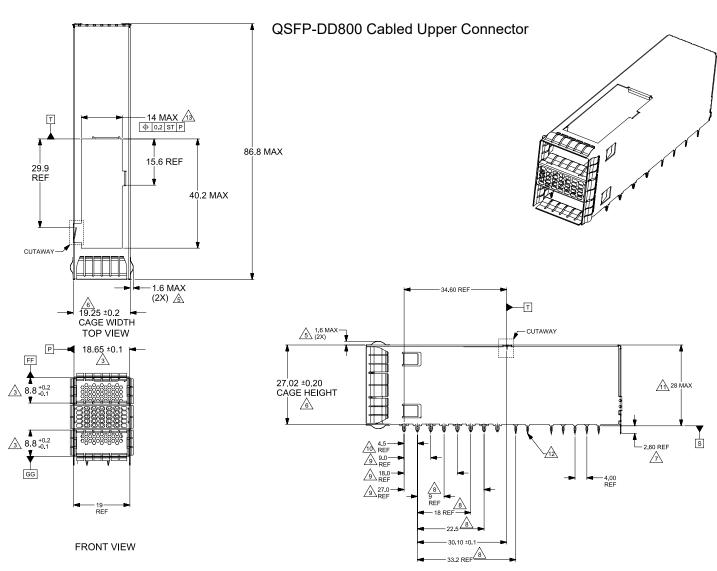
2x1 Cabled over SMT connector and cage - Top View
